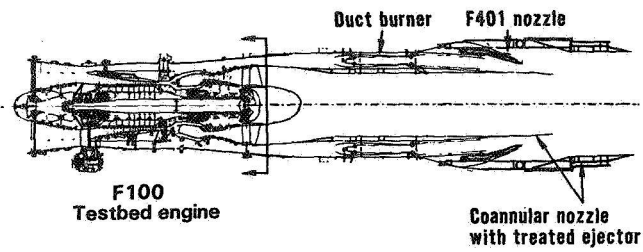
VCE testbed demonstrator configuration using a Pratt & Whitney Aircraft F100 engine as gas generator to develop proper environment of testbed components - the duct burner and coannular nozzle.
